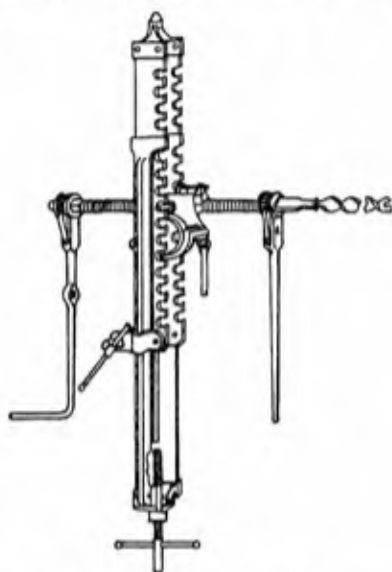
HAND-BORING MACHINE WITH DIFFERENTIAL FEED
